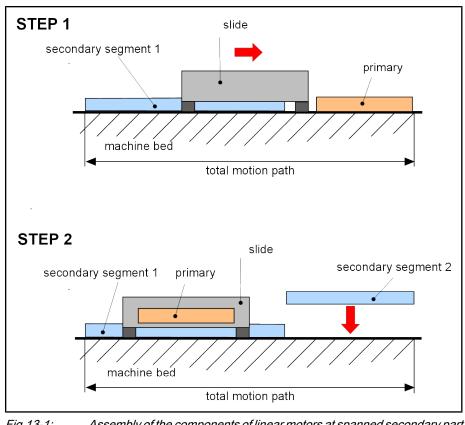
Assembly of the components of linear motors at spanned secondary part
